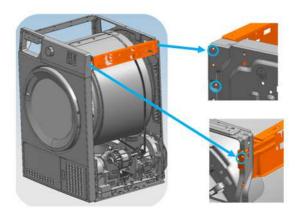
Connection points for Support Sheet Brackets on Right Hand Side (RHS)
